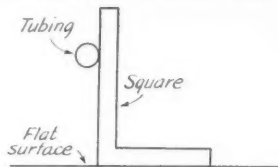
Marking line for spotting holes to be drilled in tubing or rod.
